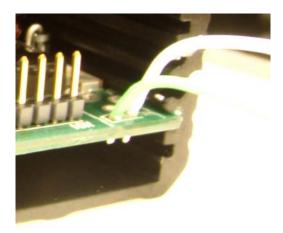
Power Wires Soldered Directly to Eye-C Board
